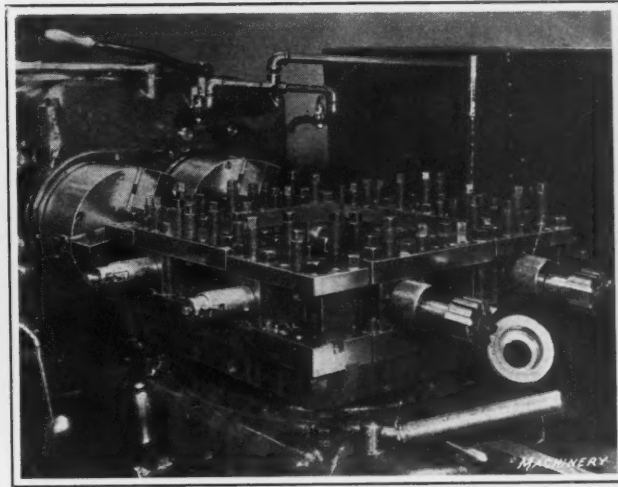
Tooling of Third and Fourth Turret Faces of Flat Turret Lathe used for machining Differential Gear Cases
